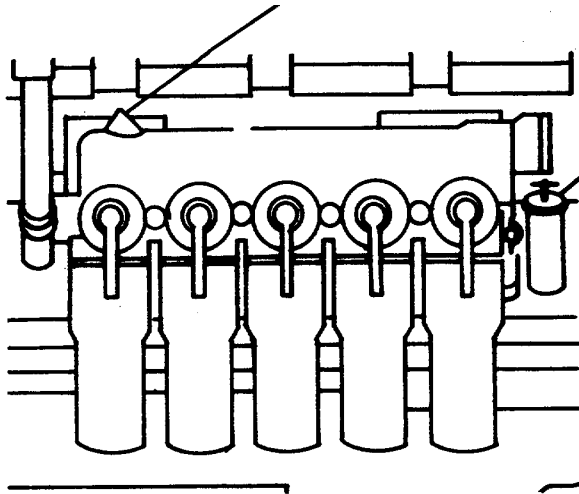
Lube Oil Priming Point and Oil Fill/Dipstick Arrangement.
